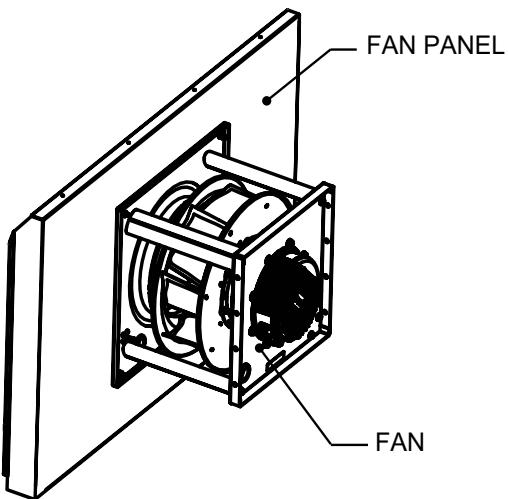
Power Exhaust Assembly (Refer to Table 36)
